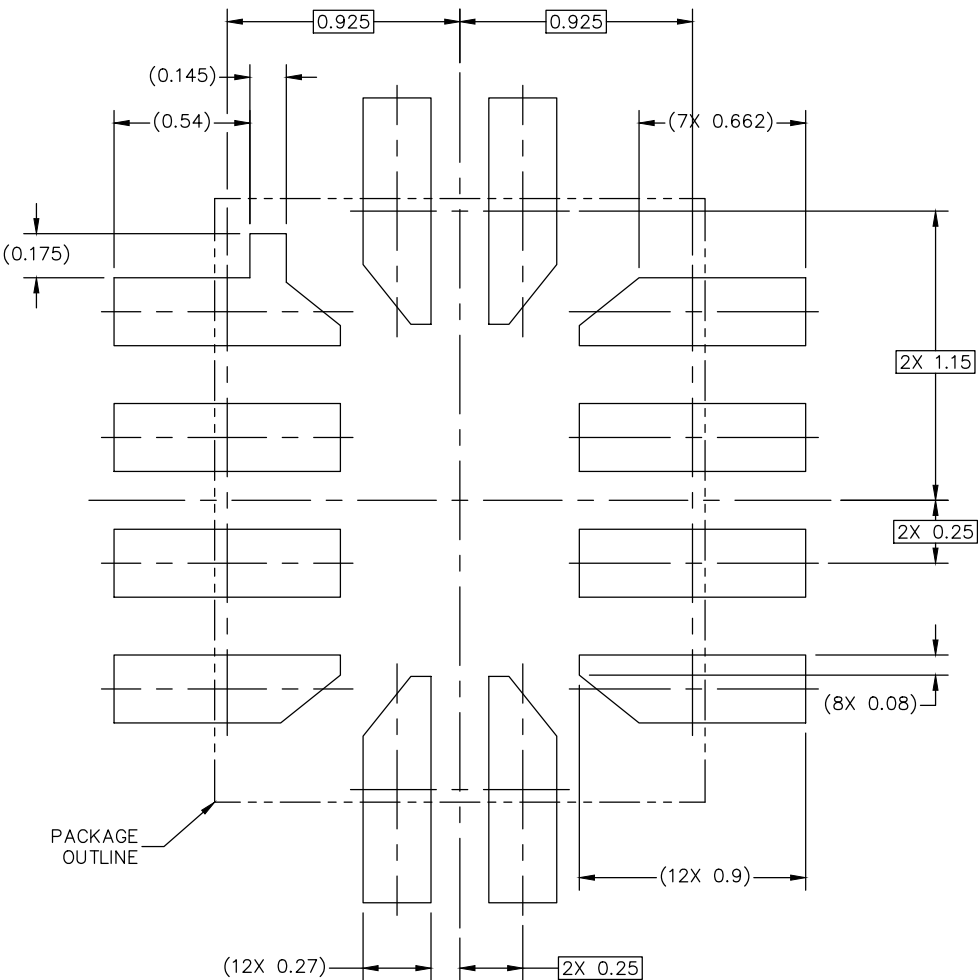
Package outline SOT2225-1(DD) (PQFN-12) solder mask opening pattern
